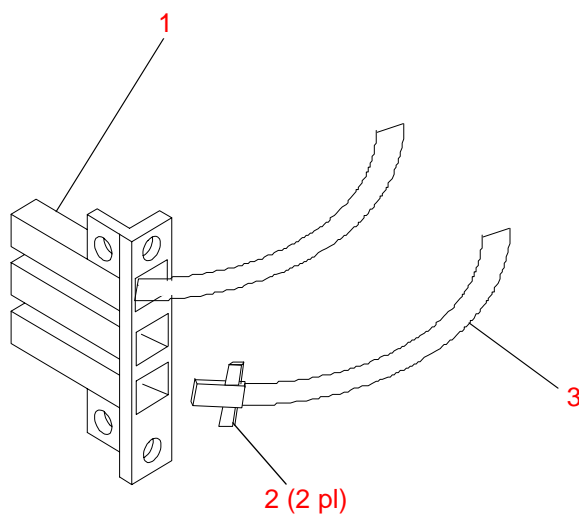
VL6 Ignitor Board Output Cable Assembly
